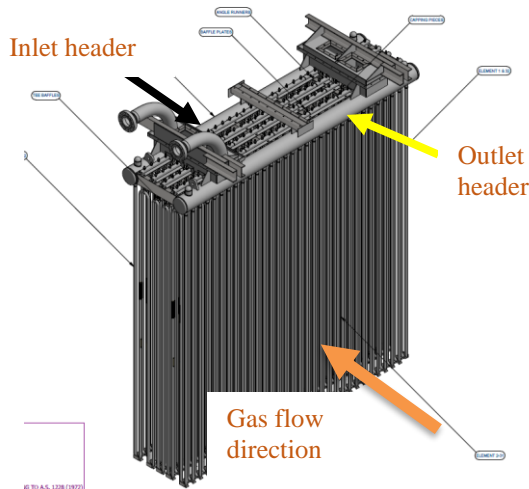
Superheater tube bundle showing tube coils between the inlet header (at the rear) and outlet header (in the foreground)
